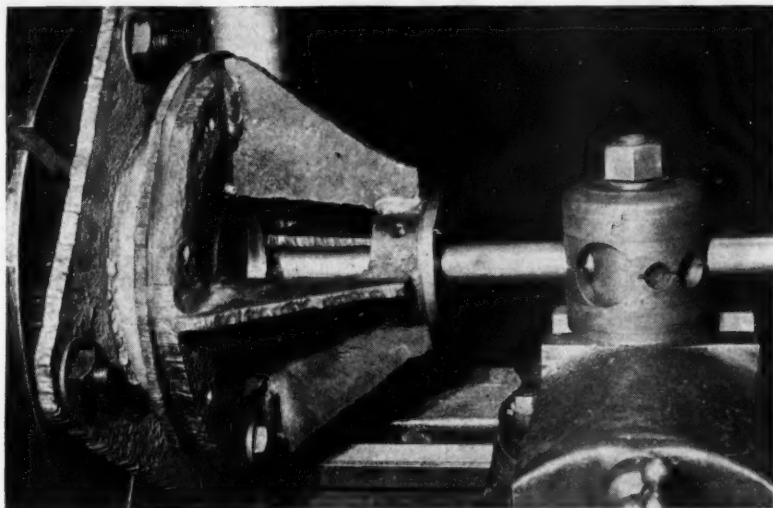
Main jig held in place on lathe by auxiliary jig for boring out Collars B and C
